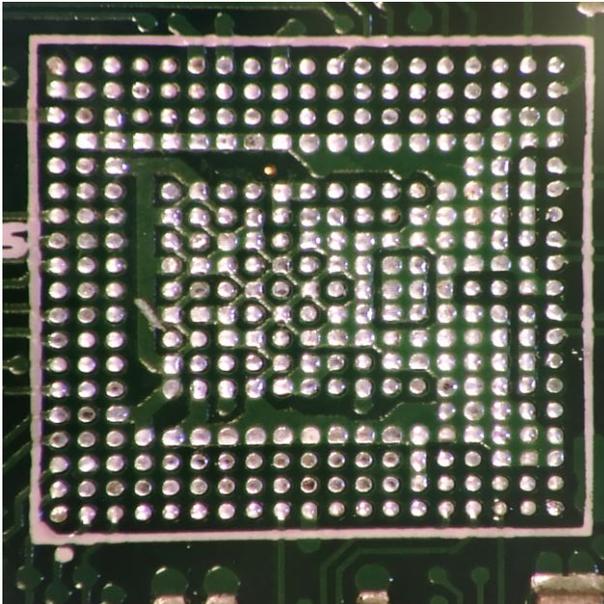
BGA pad pattern during rest solder removal indicates different pad geometries and via connections
